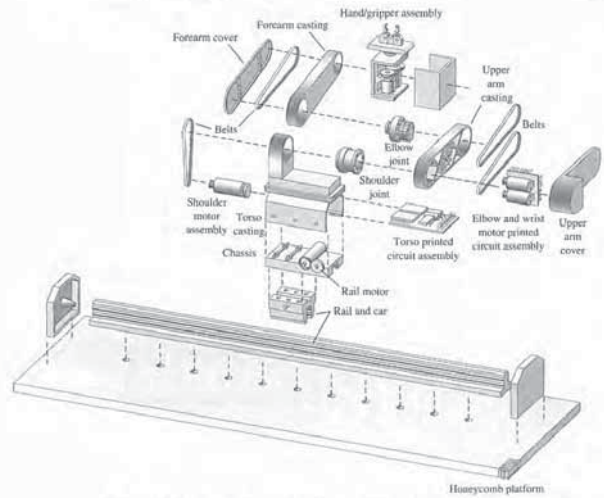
Exploded view of the ORCA robot showing the components [15]. (Courtesy of Beckman Coulter, Inc.)
